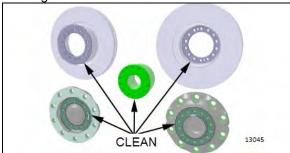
CLEANING HUB BEARING, ROTOR AND HUB FLANGE CLAMPING SURFACES
